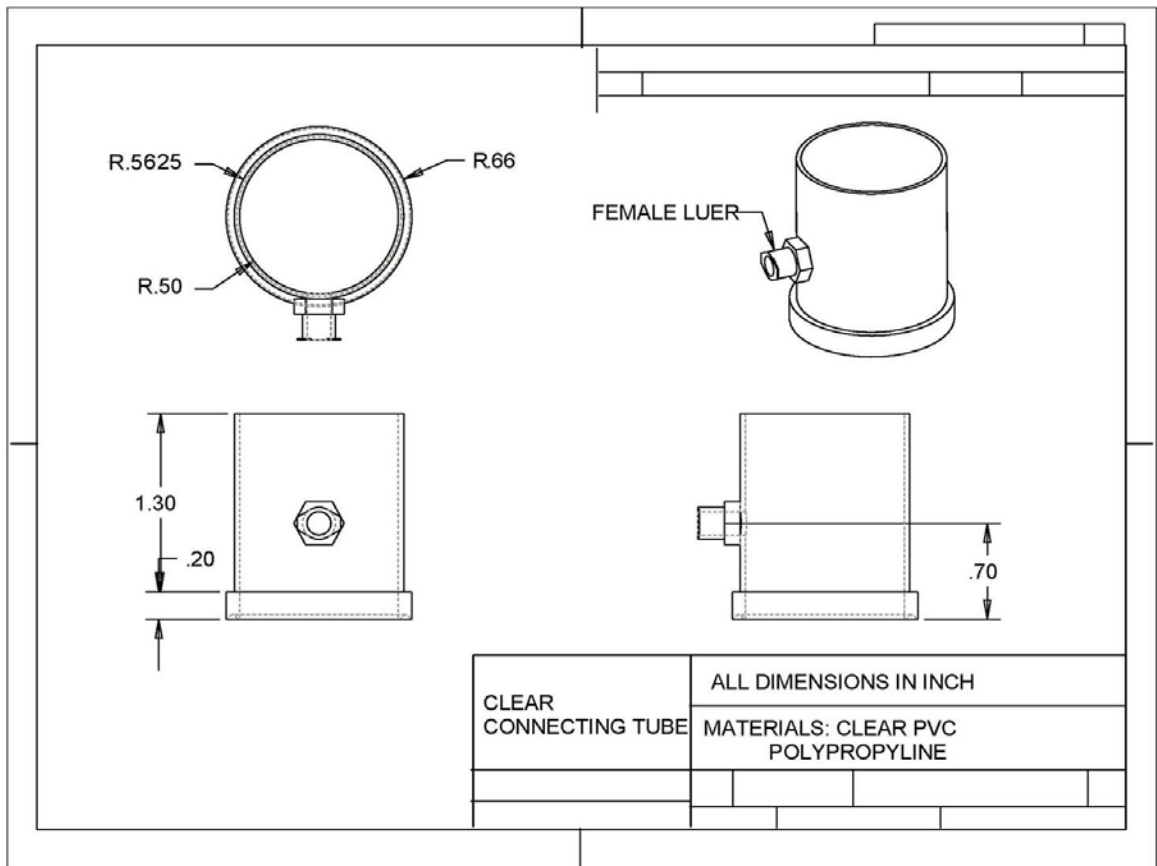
2D CAD model of the clear connecting tubing with detailed dimensions. Figures are presented as the top, front, right hand and isometric views.
